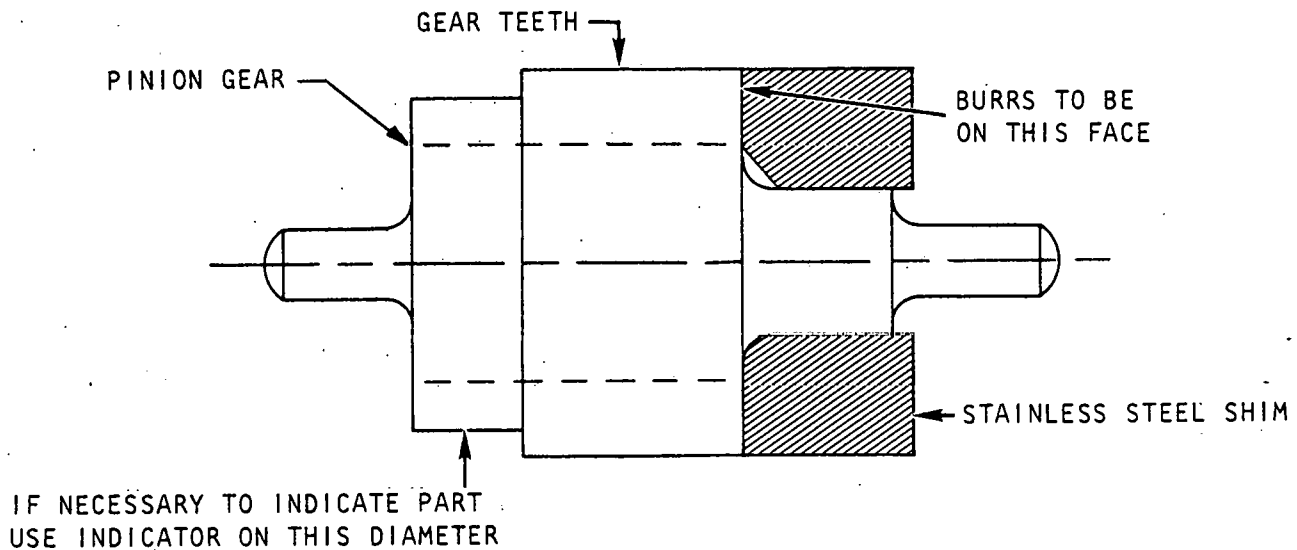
Identify Desired Burr Location and Use Backup Materials to Minimize Burrs
